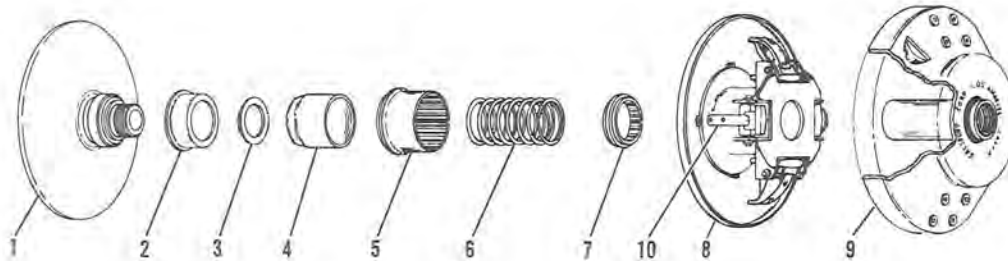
Drive Clutch (Models 5815-1100, -2000; 5818-0100 and 5813-3100)
